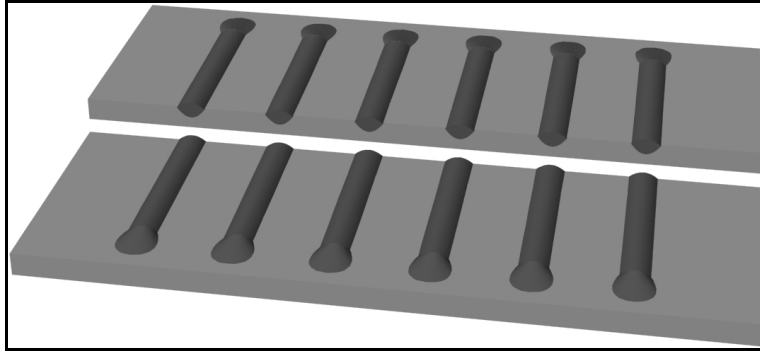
Schematic of a Sectioned Bead-on-Plate Weld Coupon with Weld Beads
